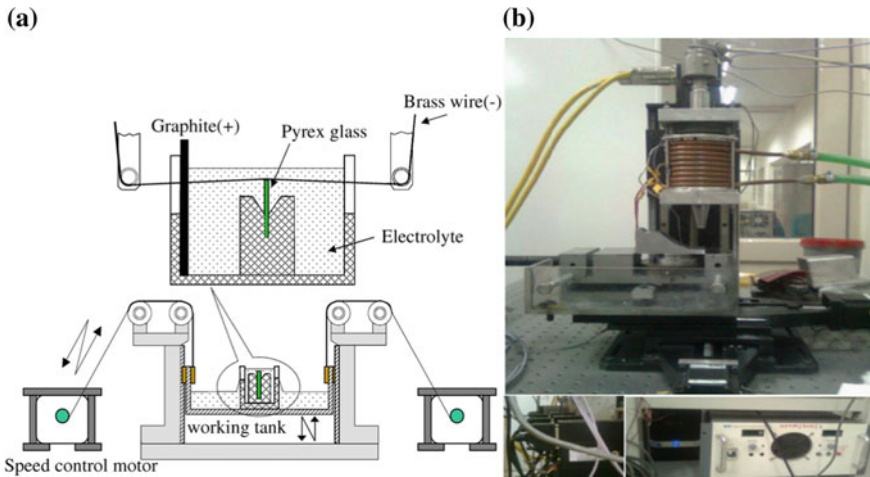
a Wire EDM machine set-up [25], b MR finishing set-up [26]
